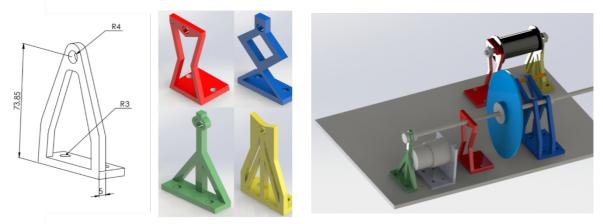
different CAD models of the slide bearing frames and Solidworks assembly of the winding machine
